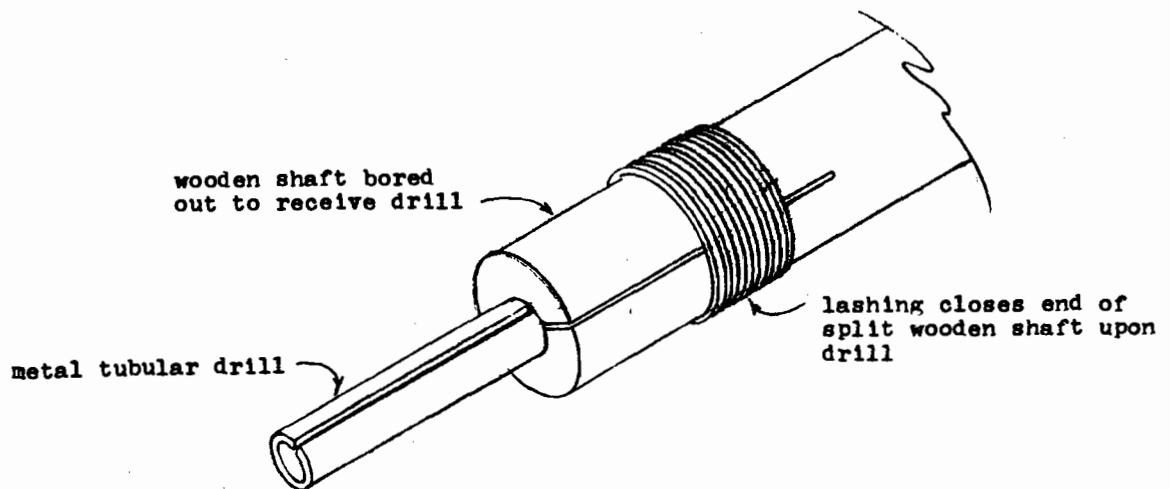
Suggested design of a tubular drill fashioned from thin metal sheet and mounted in a wooden shaft.
